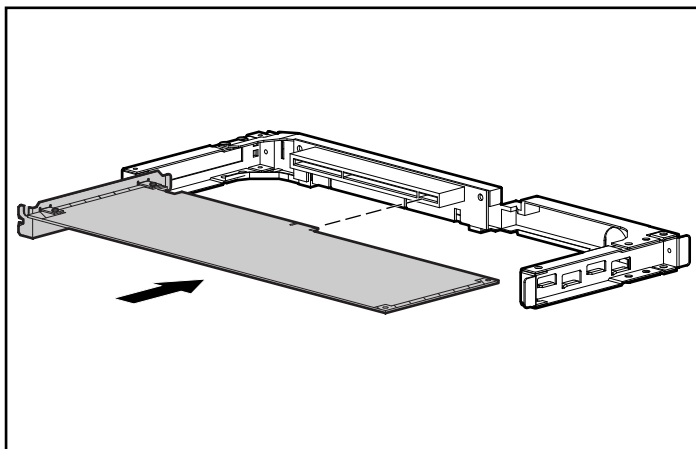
Installing the array controller expansion board into the PCI riser board assembly
